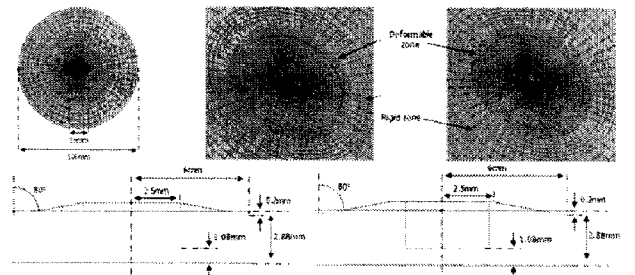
Top view for cylindrical pin and triangular pin (upper), and model dimension (lower) for FVM analysis with AA5083-H18
